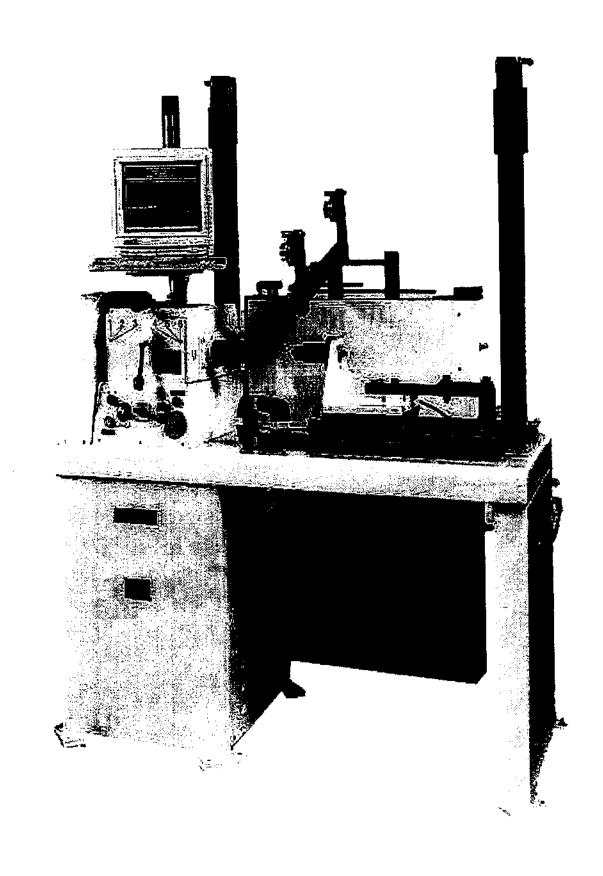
SINGLE SPINDLE COIL WINDING MACHINE
